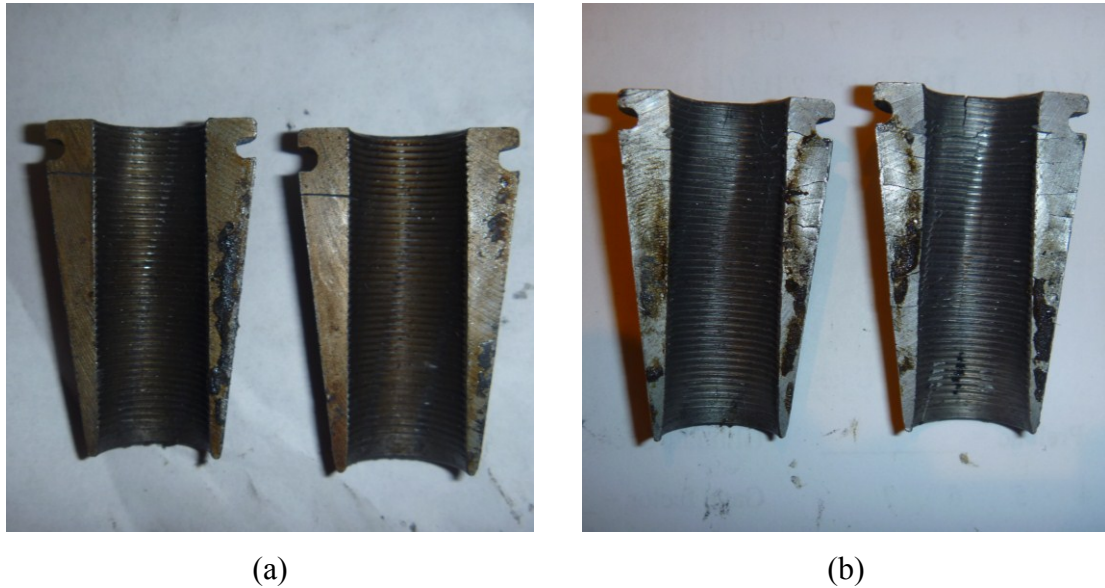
Cracking pattern after retaining strand loaded to failure of (a) standard and (b) modified wedge pieces.
